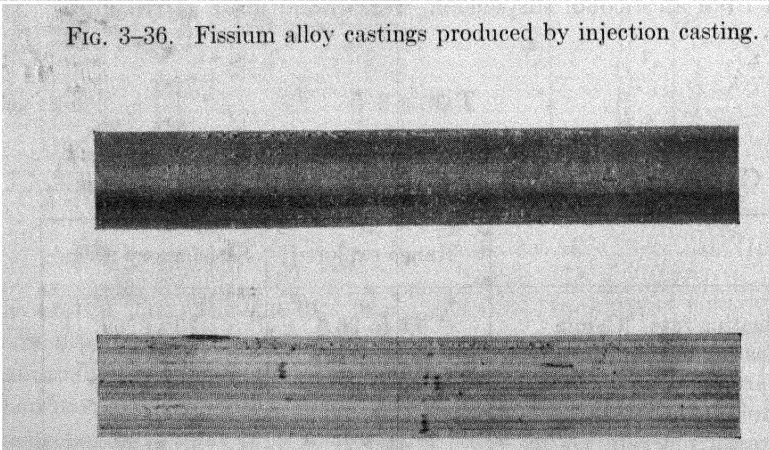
Surfaces of pins produced by injection casting into thoria-coated molds. The pin at the bottom is before brush cleaning; at the top, after brush cleaning.
